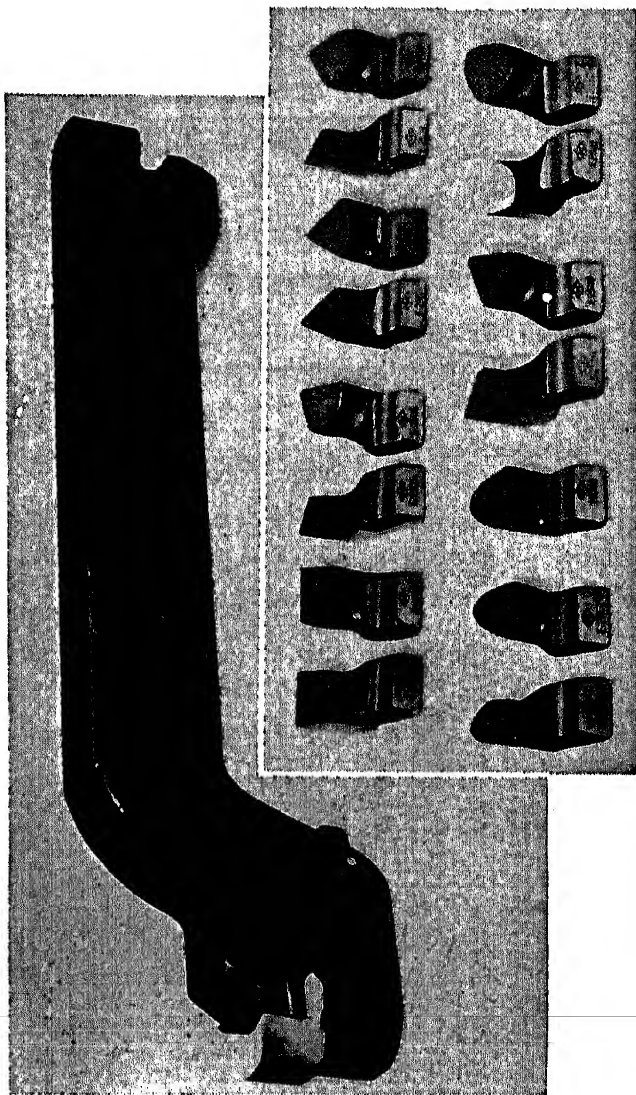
A planer type tool bit holder with interchangeable bits. One end of the holder is goosenecked, the other is straight. (Courtesy The O.K. Tool Co.)
